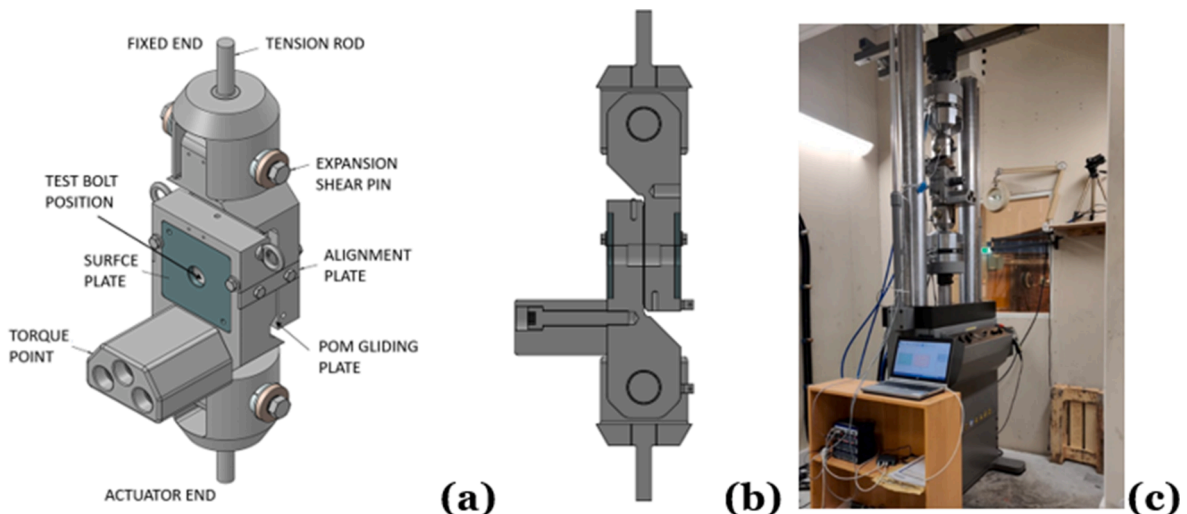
(a) Test jig schematics, (b) cross-section view, and (c) jig installed in hydraulic test rig.
